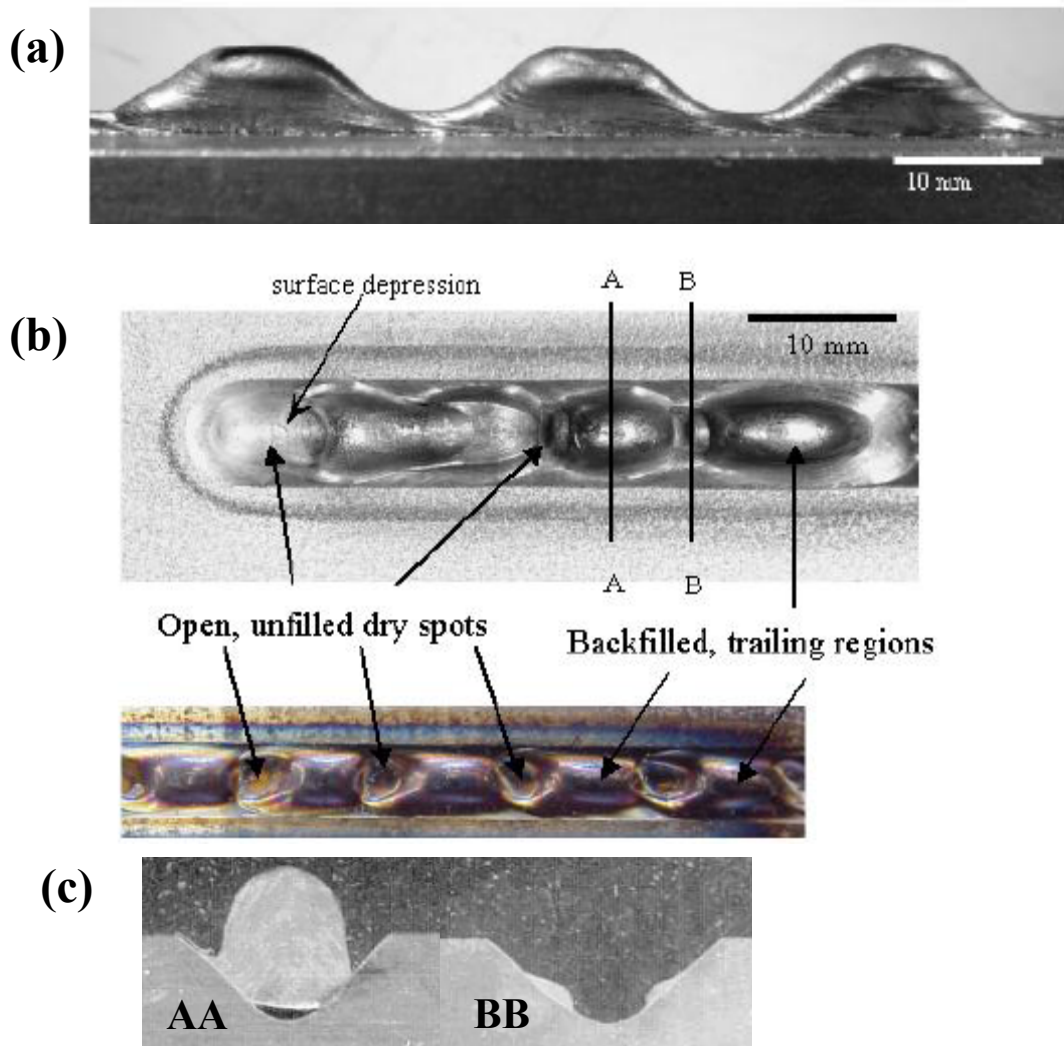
Humping defects in (a) in GMAW [32] and (b) in GTAW [26]. These defects are characterized by periodic undulation or bead-like appearance. Figure (c) shows the transverse cross-sections of the weld bead along sections AA and BB (marked in figure (b)), respectively [26]. Section AA has extra mass deposition while section BB does not have any metal in that region which reduces the strength of the joint.
